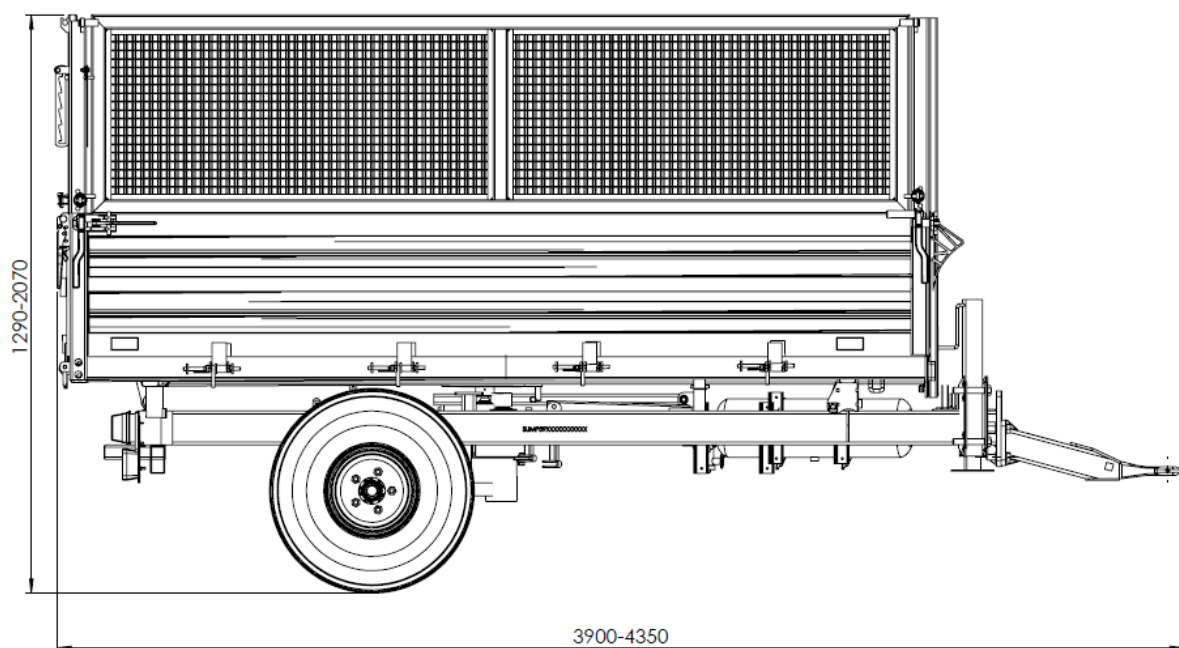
Dimensions of the trailer with a pneumatic or hydraulic brake – side view
